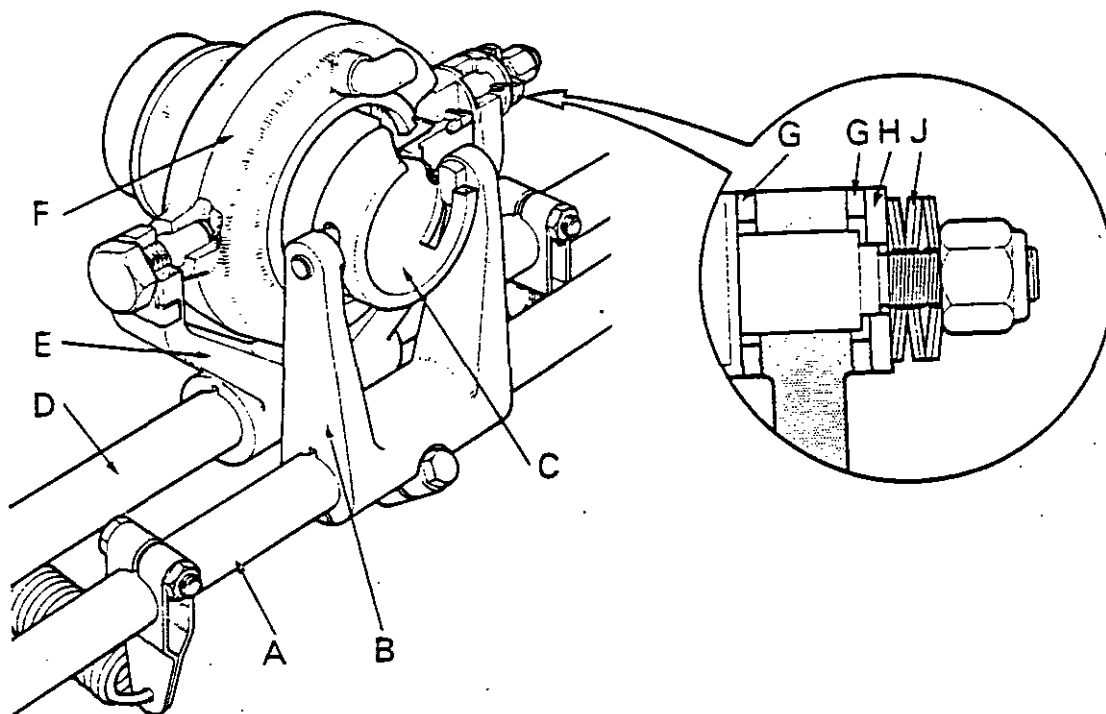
CLUTCH RELEASE MECHANISM — 1200 TRACTORS
